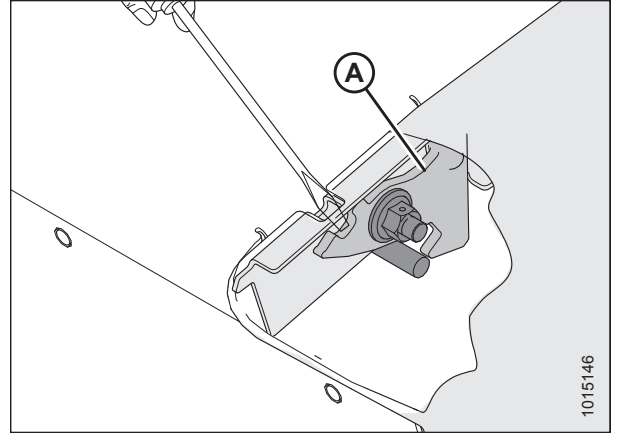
Cutterbar Door Latch Access Hole (Export Only)
